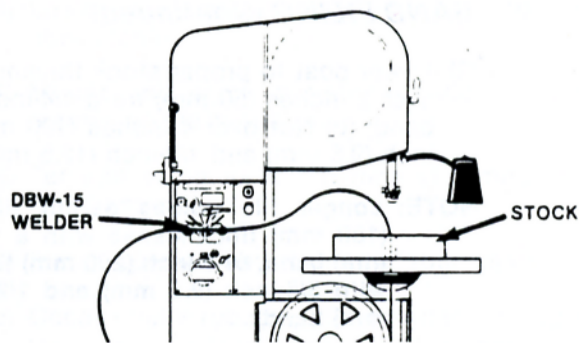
INSULATE SAW BAND BEFORE WELDING.
